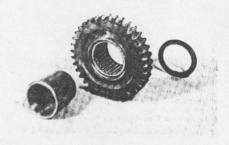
Rework 1st gear, special thrust washer and needle bearing.
